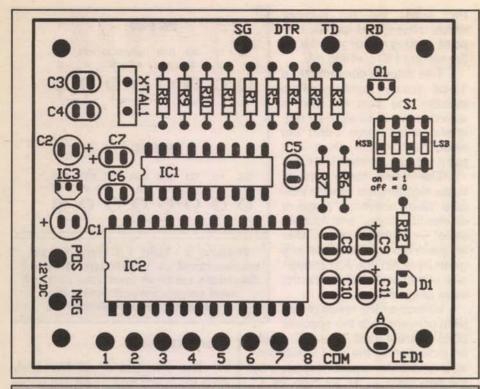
Use this parts placement diagram when soldering components onto the PC board.
